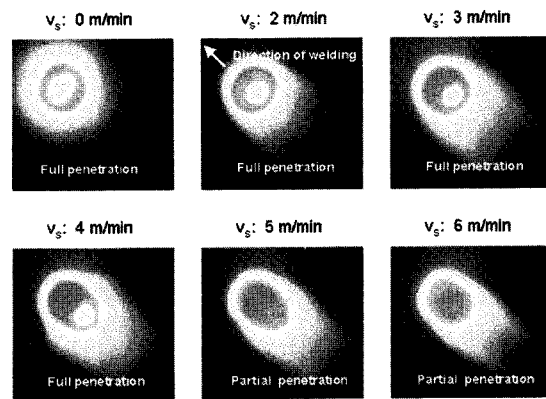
Weld pool monitoring image using CMOS camera⁸⁾
